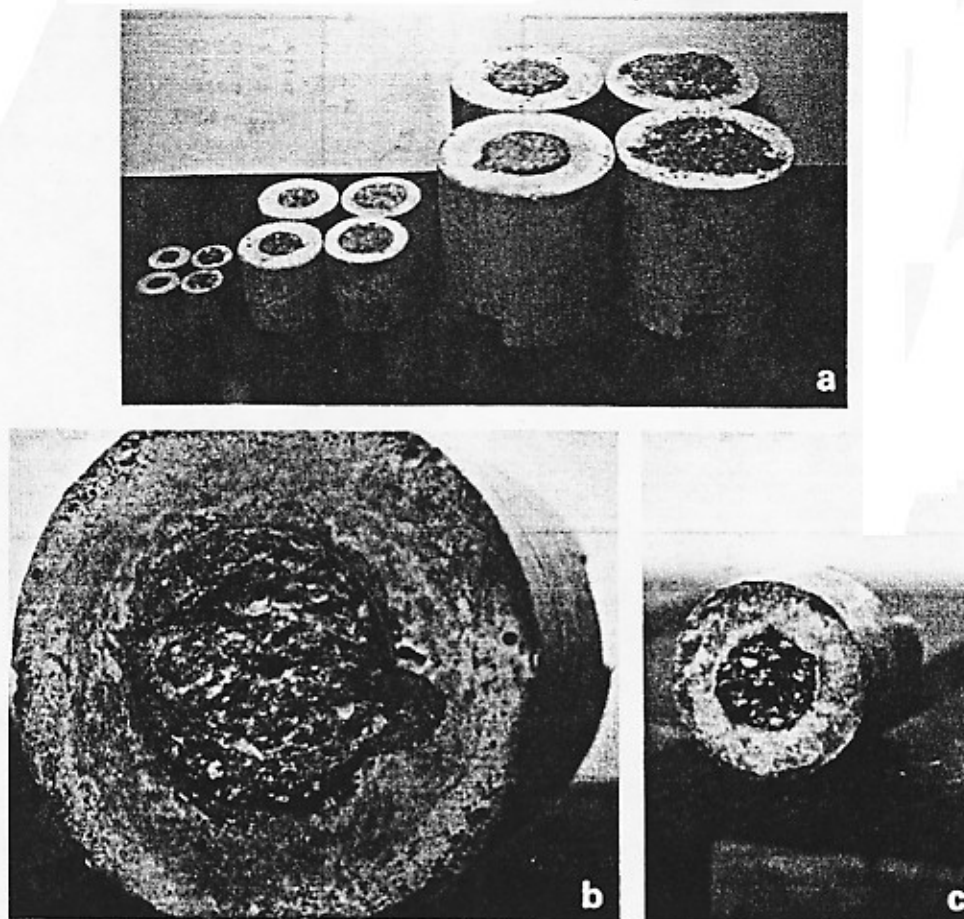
Fractured specimens after testing, showing the failure surfaces
